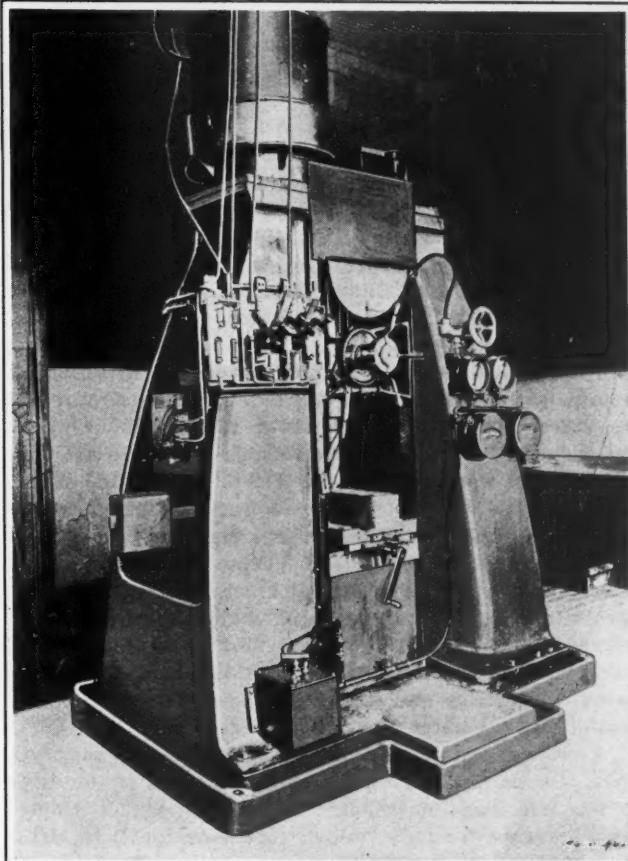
Special Drilling Machine used in Laboratory of Standard Tool Co.
